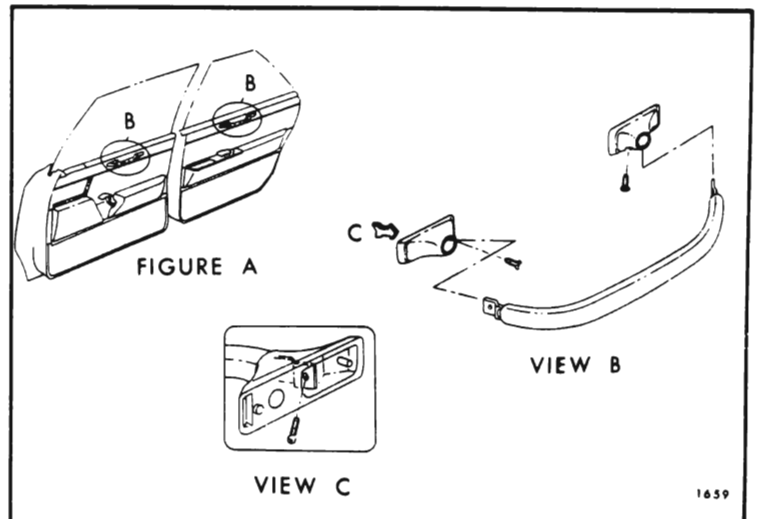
Door Pull Handle Installation - 68200 Series
